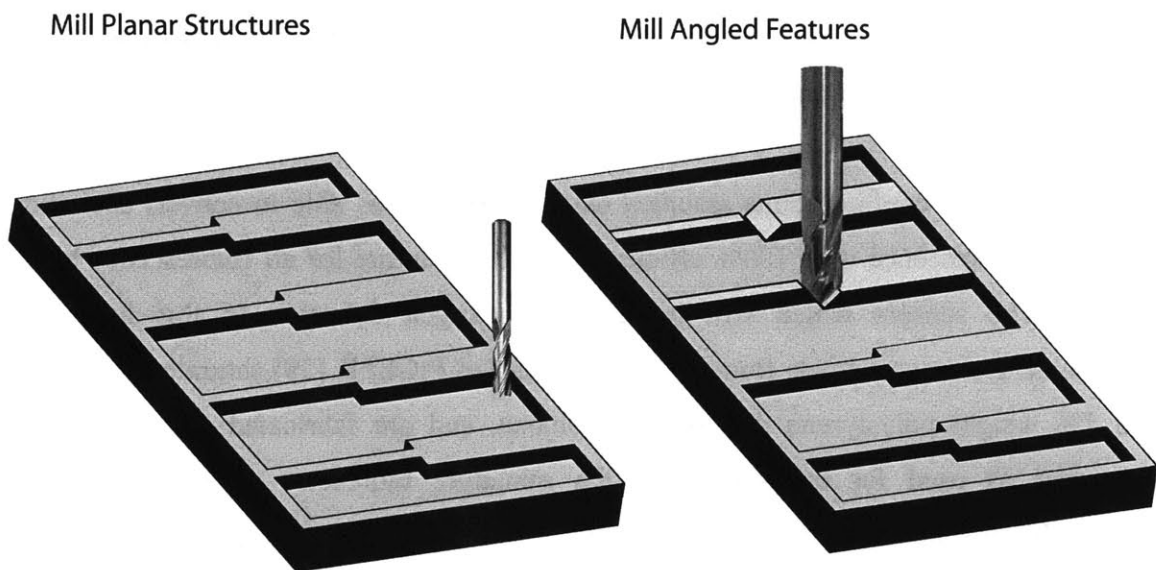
Illustration of the milling process for making the oxygen sensor mold. Straight waveguide sections are first machined on a CNC milling machine (left), then a drill mill is used to add bends (right).
